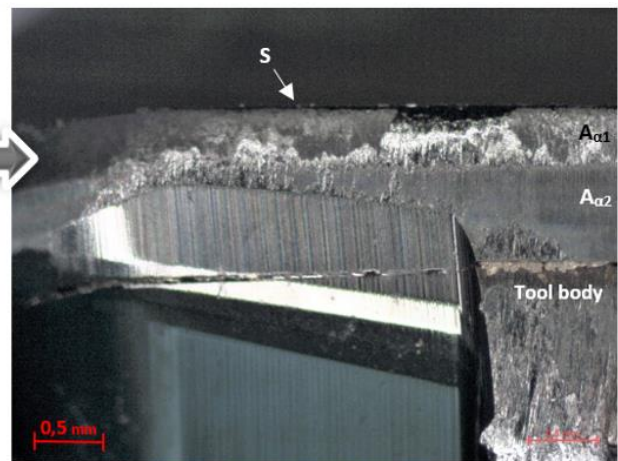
Detailed Flank Face of DP End Mill After 10 Passes.
